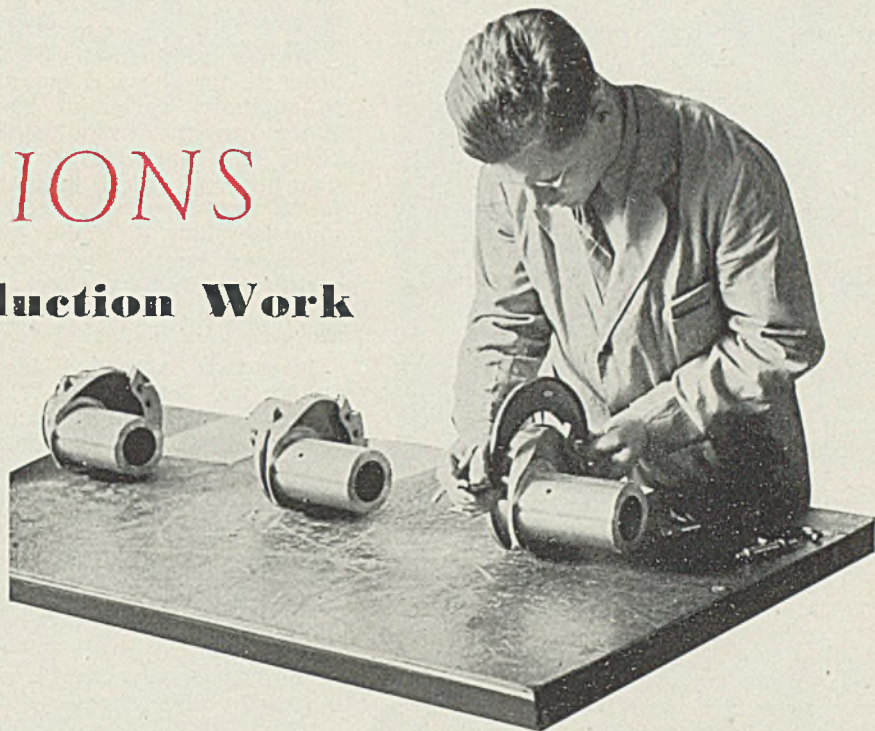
Forged and highly machined sections for radial aircraft engines undergo a large number of precise gaging operations as part of the elaborate inspection procedure. Here an operator is using a large caliper to check a bearing diameter
